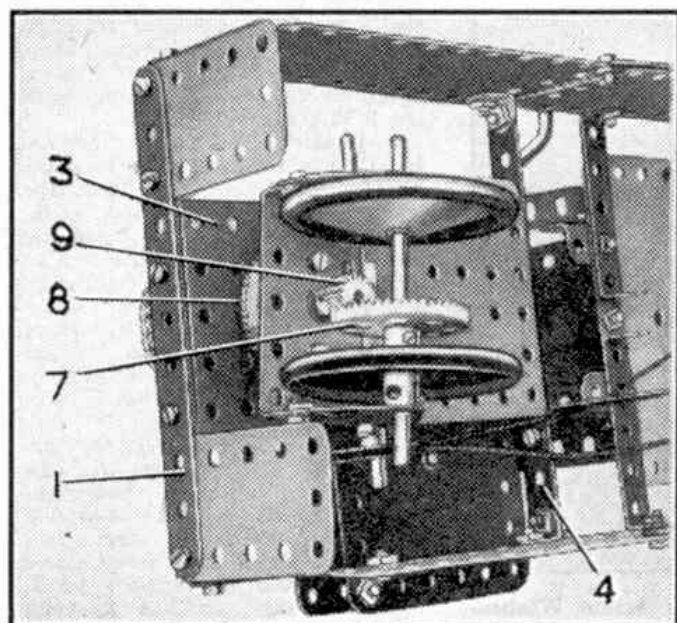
The caster steering unit showing how the drive is taken to the wheels.
